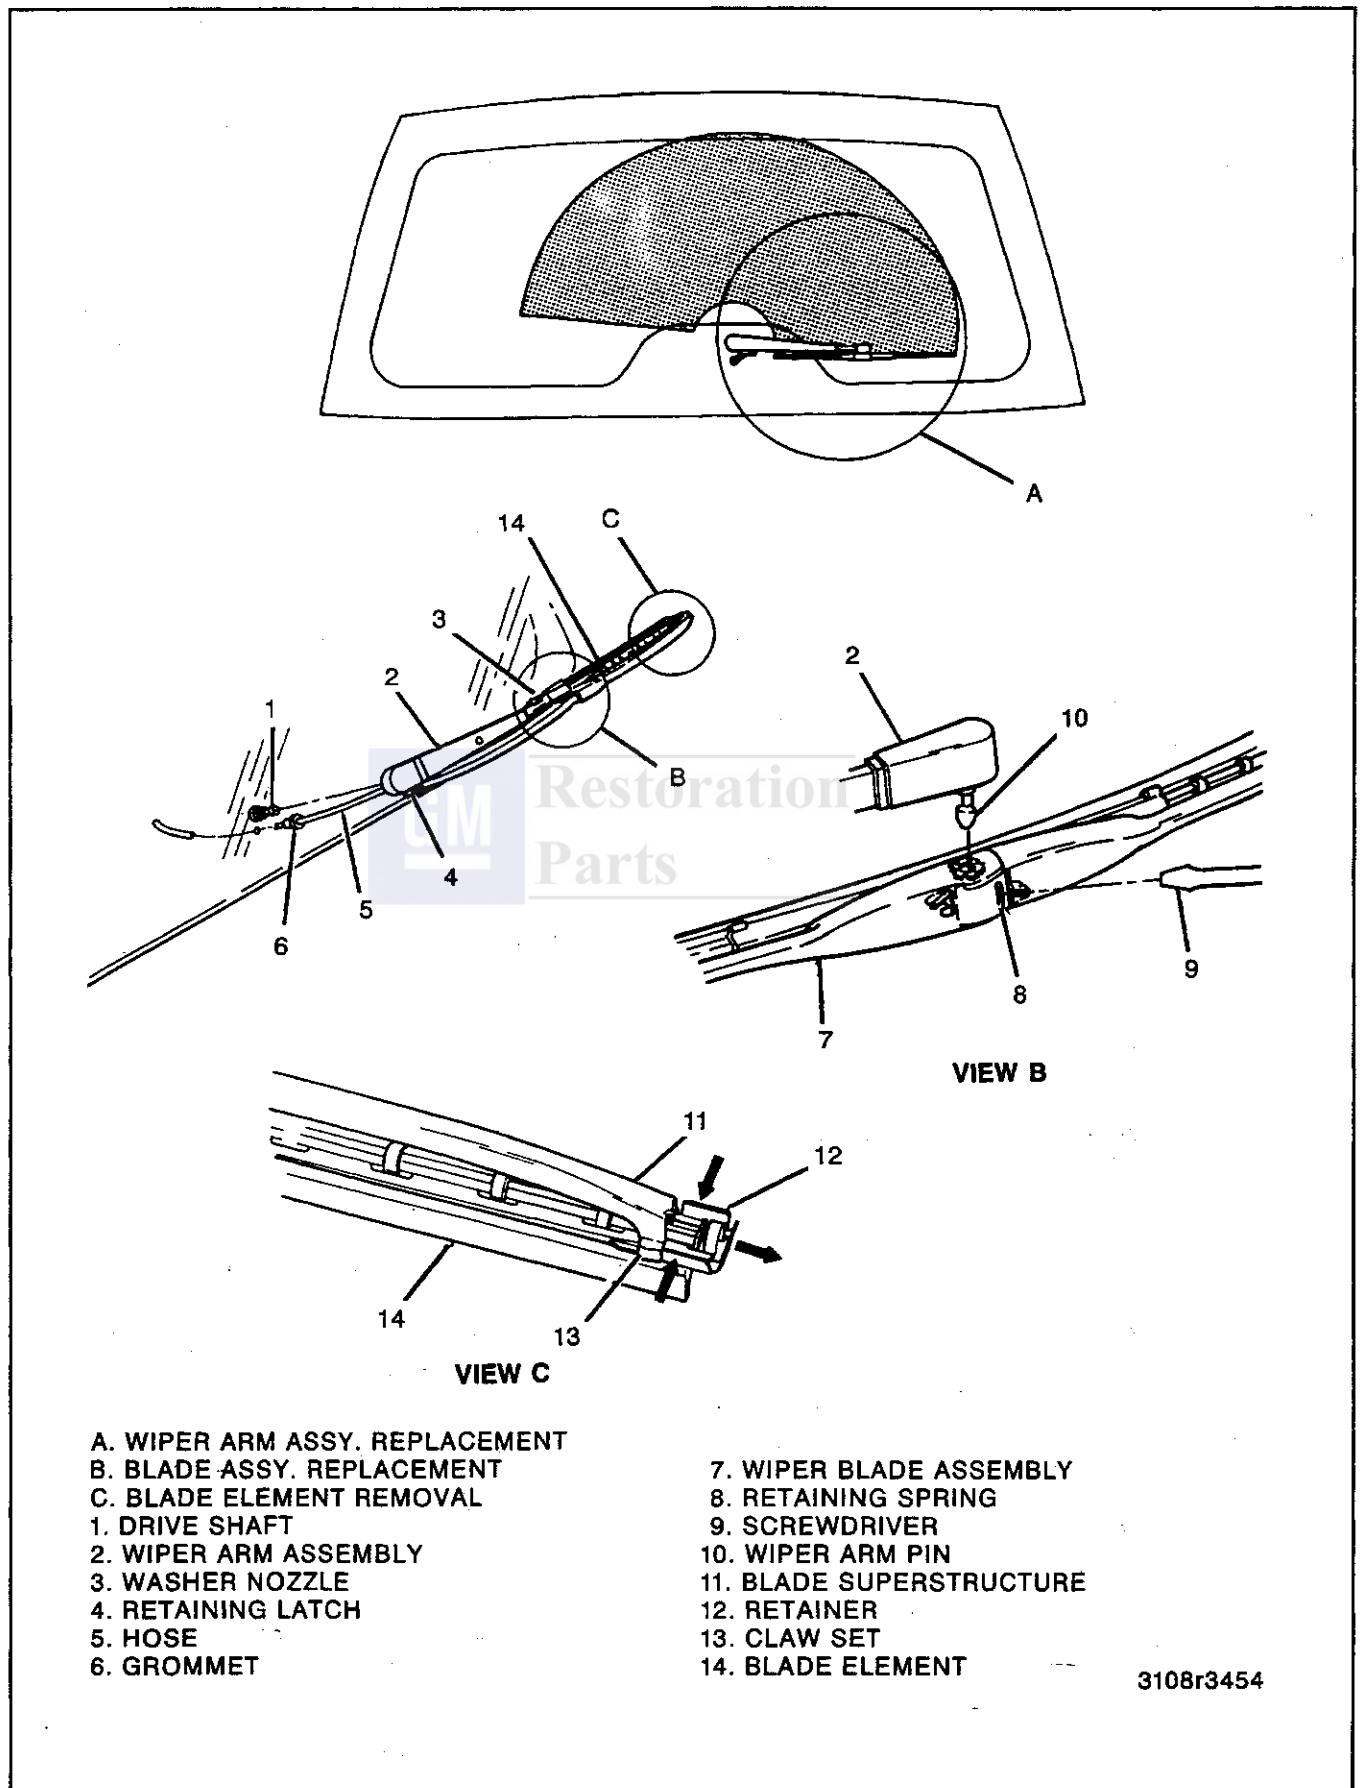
Wiper Arm Assembly, Blade, and Element Replacement
